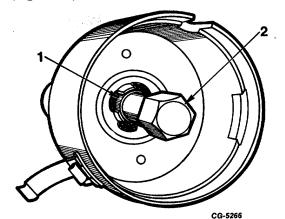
Bushing Remover SE-1955-5 Installed in Upper Bushing
